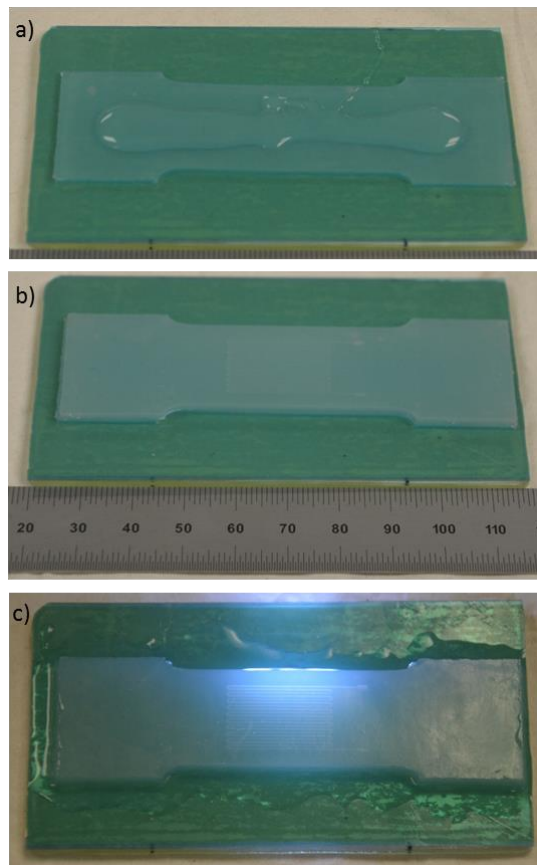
Photos of the process of laser cutting flash tape on a silicone substrate to be used as a mold for casting a soft serpentine channel sensor.
